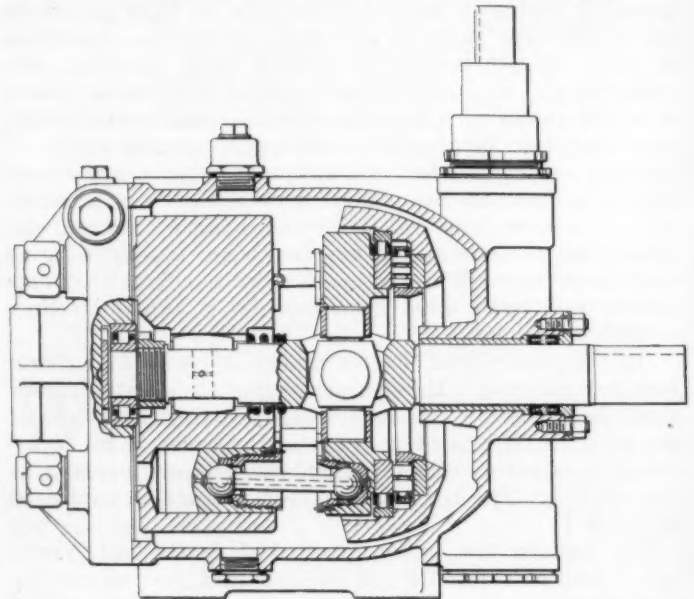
SECTION THROUGH THE HYDRAULIC MOTOR
